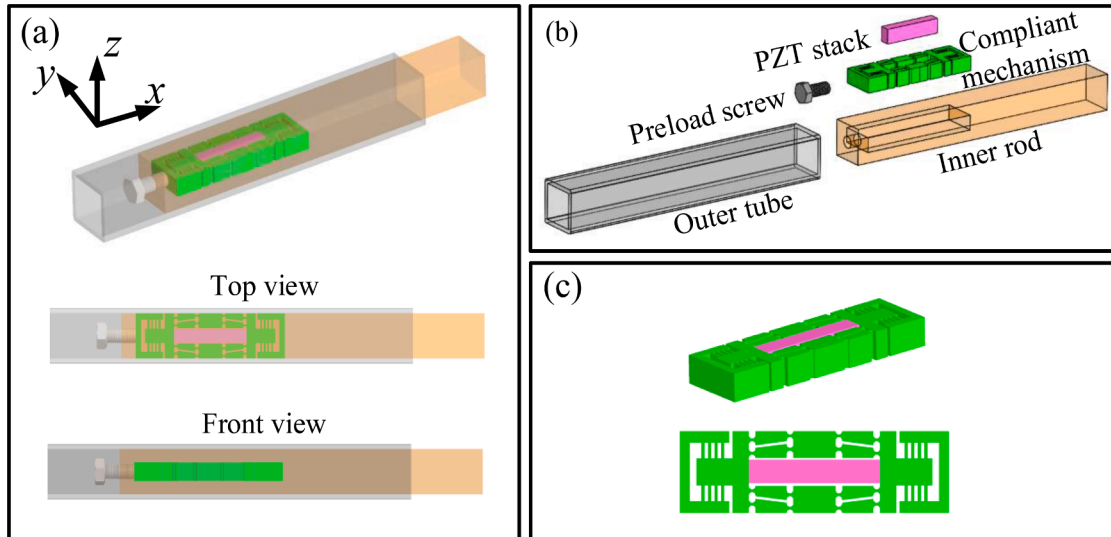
The CAD model of the lockable joint. (a) Assembled views. (b) Explosion views. (c) The inner CM with PZT actuation.
